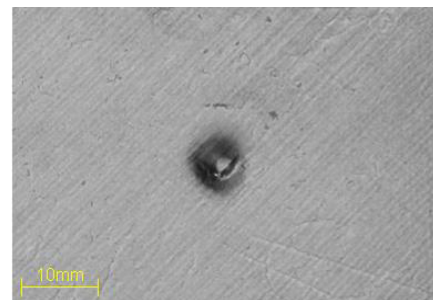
20 mm impact at 20 J on 17 ply unpainted produced a deeper, jagged edged surface flaw
